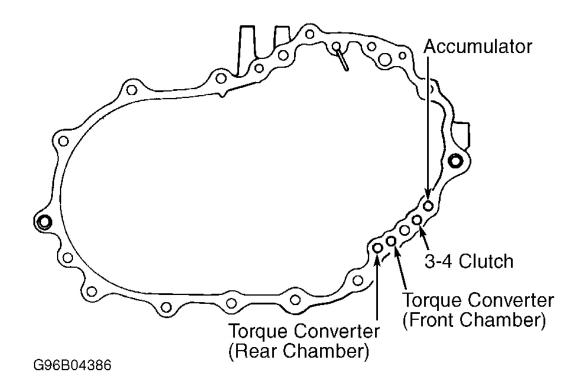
Identifying Transaxle Case-To-Converter Housing Oil Passages Courtesy of FORD MOTOR CO.
